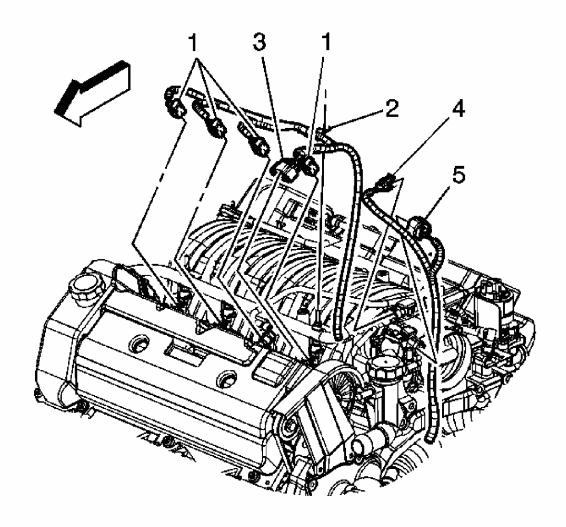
Identifying Engine Harness Electrical Connectors Courtesy of GENERAL MOTORS CORP.
